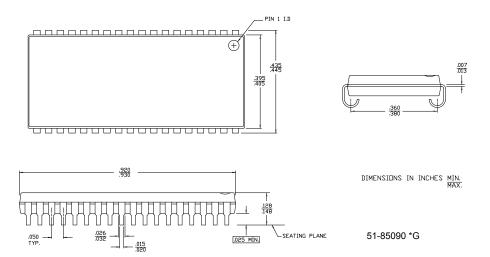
36L SOJ V36.4 (Molded) Package Outline, 51-85090
